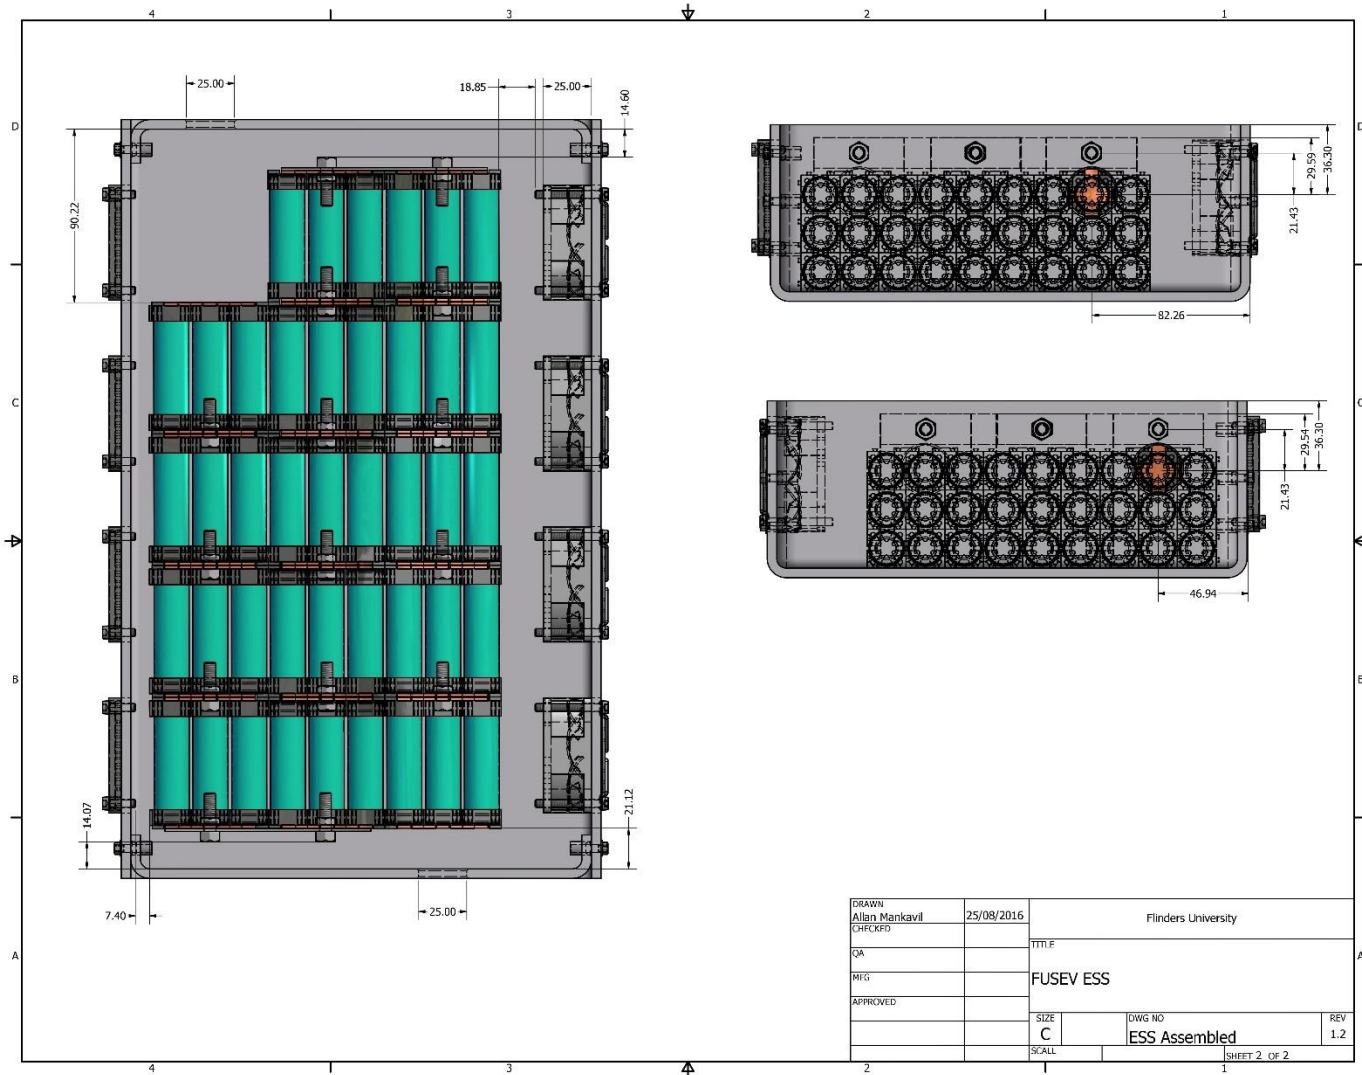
The mechanical drawing of the ESS Enclosure with BARR and Fixtures, showing internal component placement and installation.
